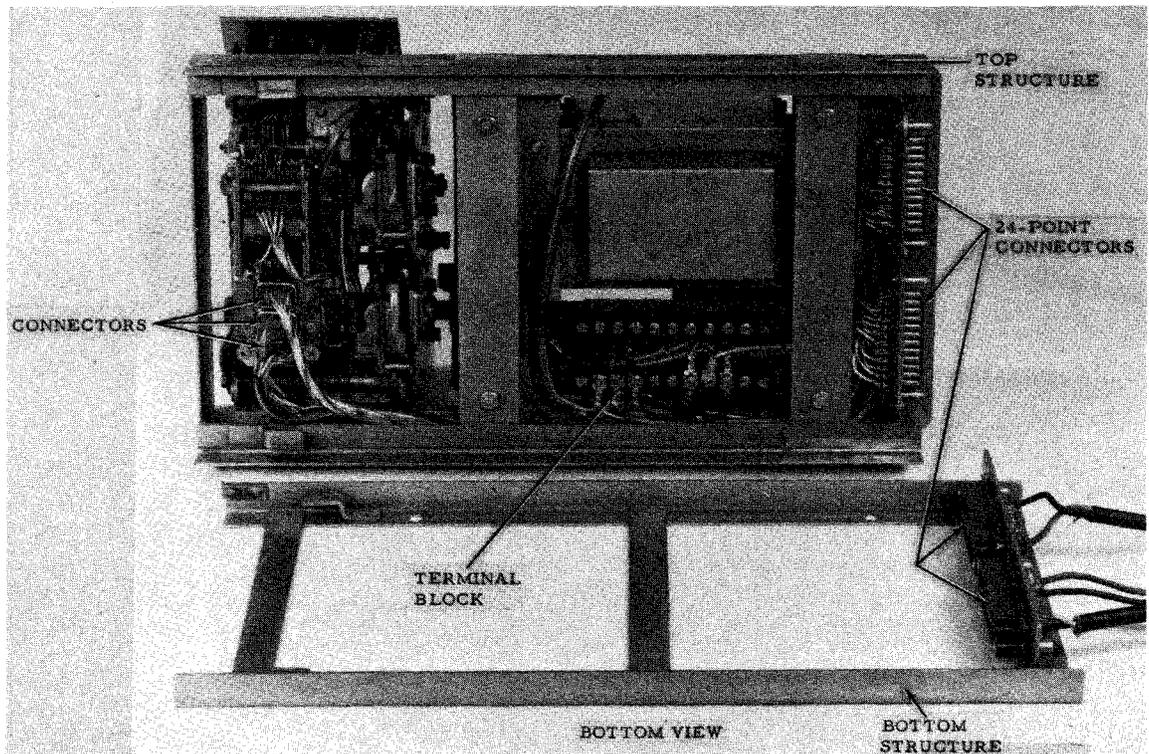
Transmitter Distributor Base - Multicontact, Single Mounting Structural View (Transmitter Distributor and Motor Unit in Place)
